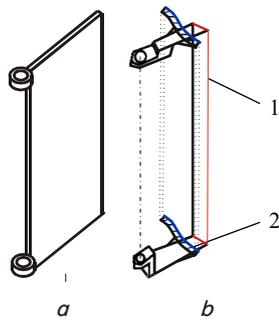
Schematic: a – basic hinged blade; b – proposed hinged blade with a cutting edge and a reflective heating surface; 1 – cutting edge; 2 – reflective heating surface
